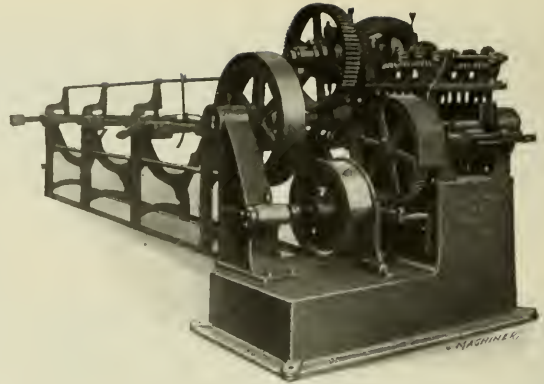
View showing Driving Mechanism of Kane & Roach Straightener and Shear
